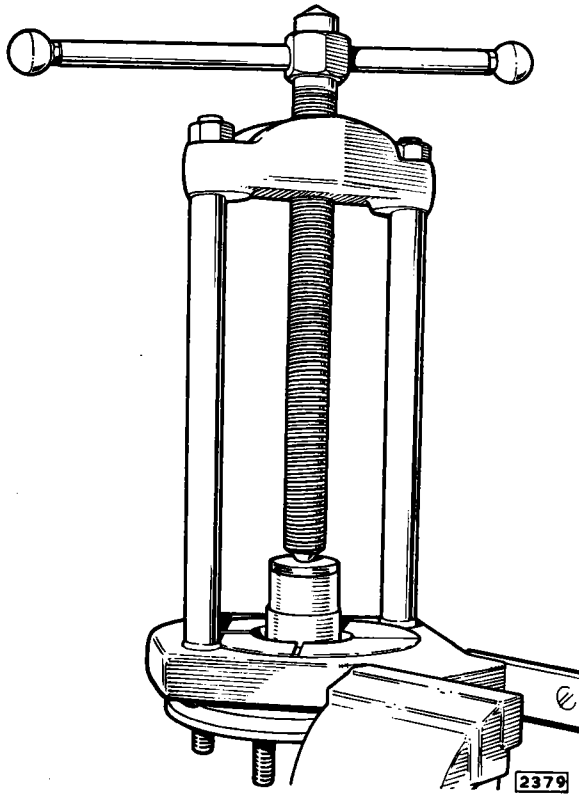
Removing the inner race from the hub using Churchill Tool No. J.16 B with multi-purpose hand-press, Tool No. SL.14
